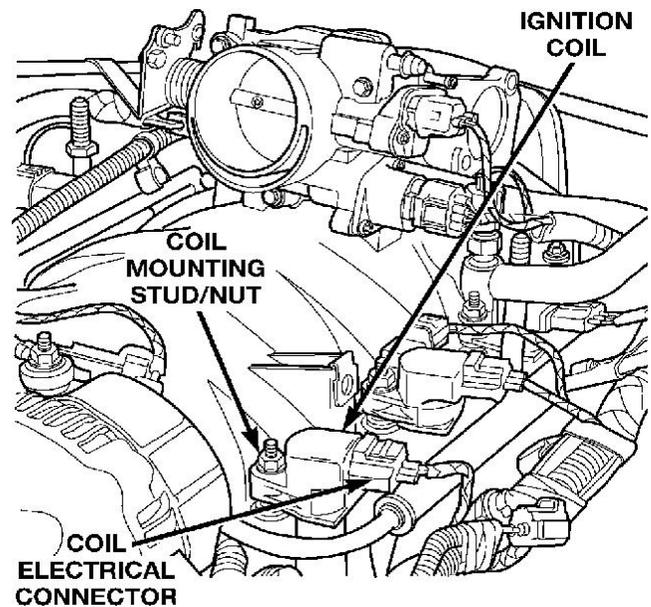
Location of Ignition Coil in 4-wheeler vehicle.
